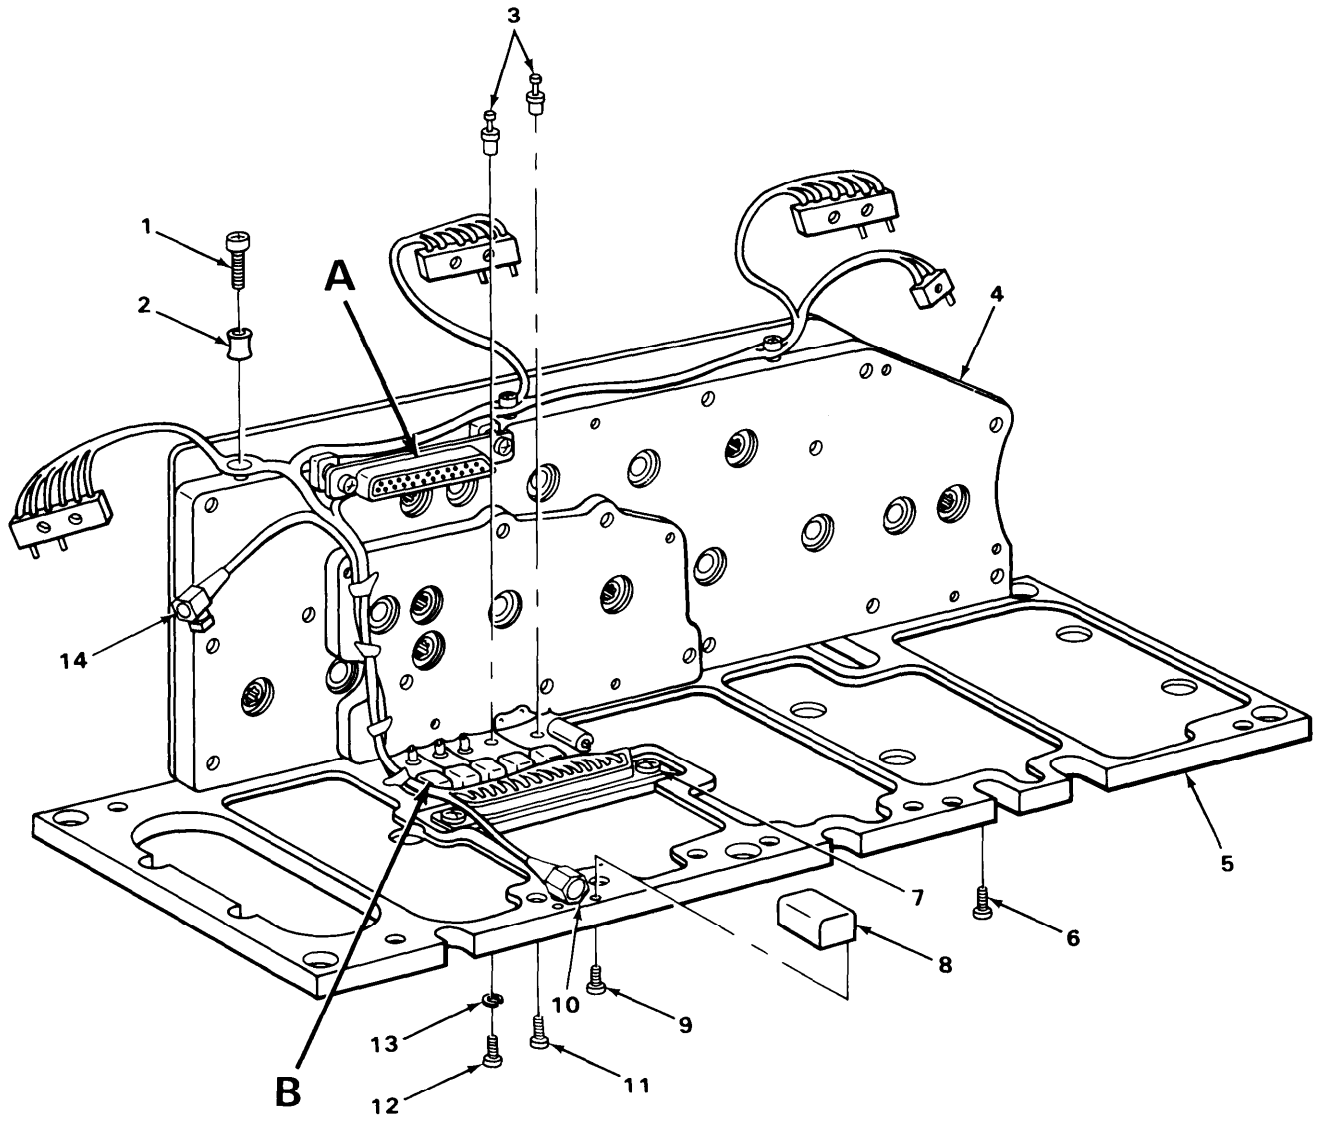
RF Chassis Subassembly (Sheet 1 of 2)
